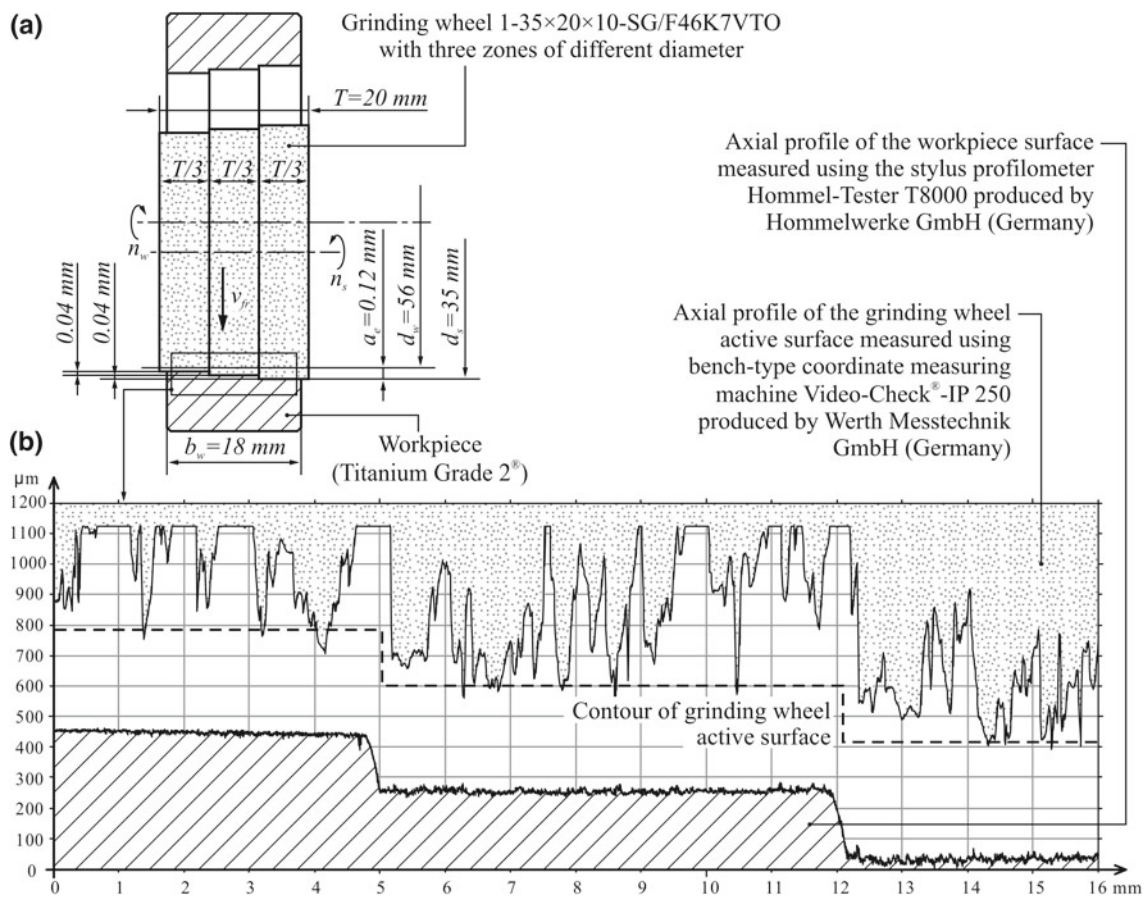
Schematic diagram of grinding process (a) as well as the setting-up of measured axial profiles of the grinding wheel and workpiece after plunge grinding using a grinding wheel with zones of various diameter (b)
